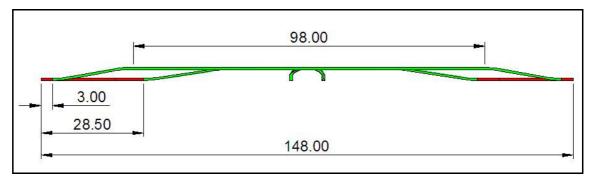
Side View Level 2 Dimensions #1
